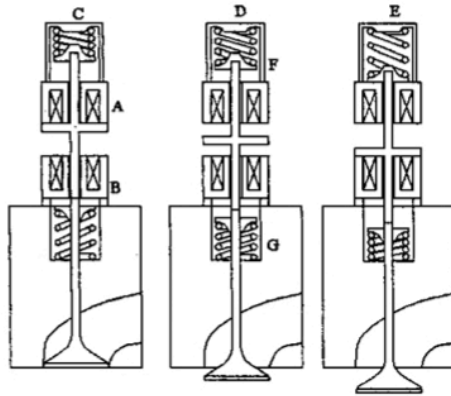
Electronically controlled engine valve actuator. A upper solenoid, B lower solenoid, C fully closed, D equilibrium position, E fully open, F upper spring, G lower spring.
